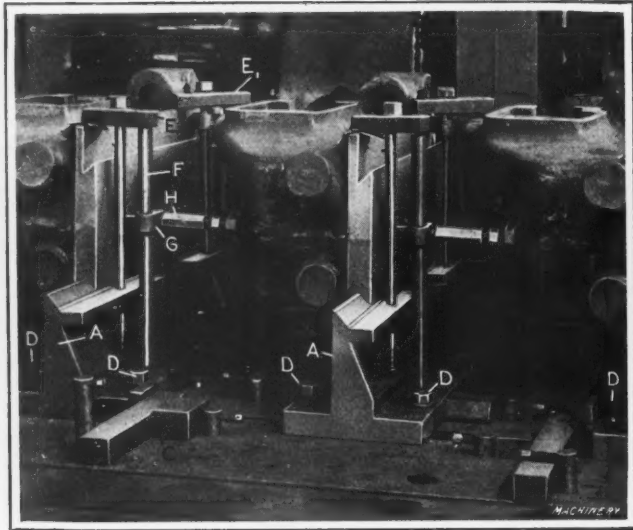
Fixture for holding Milling Machine Knees while planing the Column Bearing
